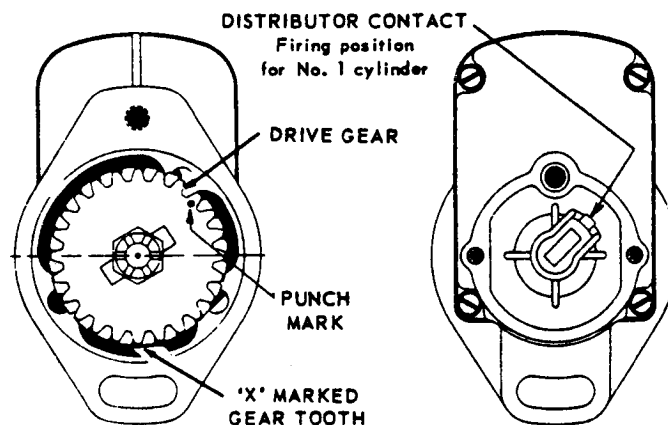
, DRIVE GEAR TIMING MARK ASSEMBLY
